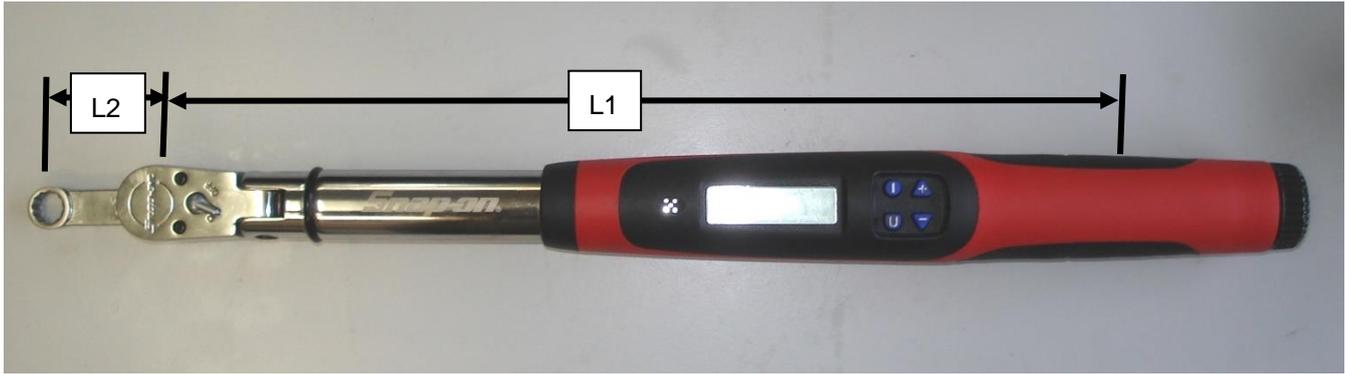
Torque Wrench & Crowsfoot Adaptor Setting 1
